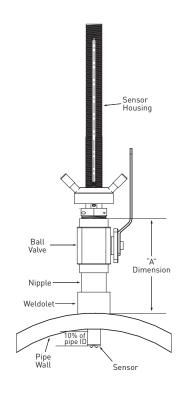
Hot-Tap installation with "A" dimension using a ball valve, short nipple and weldolet (threadolet)
